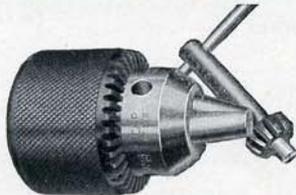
3-Jaw Drill Chuck 1/2-in. Capacity Cat. No. 1201. Price....\$8.50
